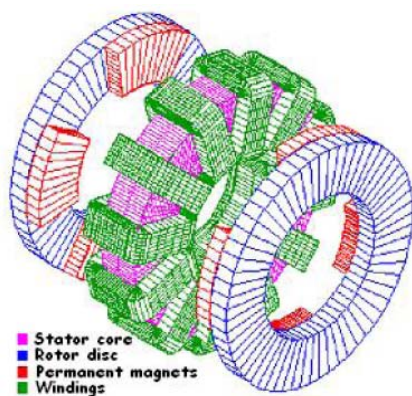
Double-sided AFPM machine with torroidal stator and two outer rotor disks [79].
